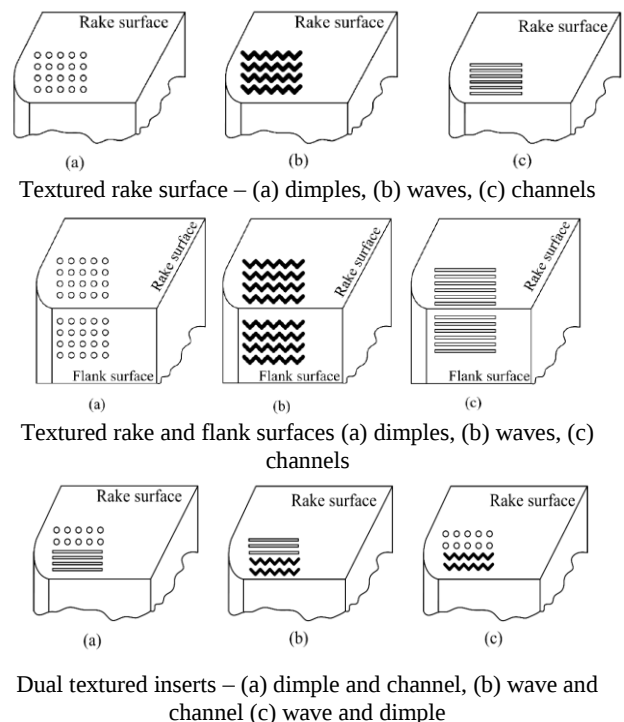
Examples of textures and their placing on the tool active surfaces [10].
